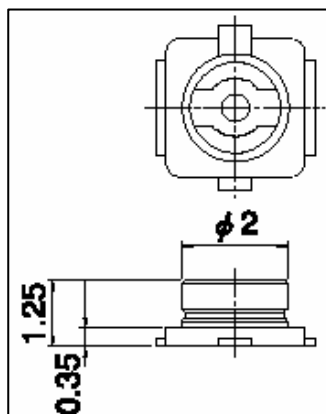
Mechanical dimensions of Hirose U.FL-R-SMT connector
